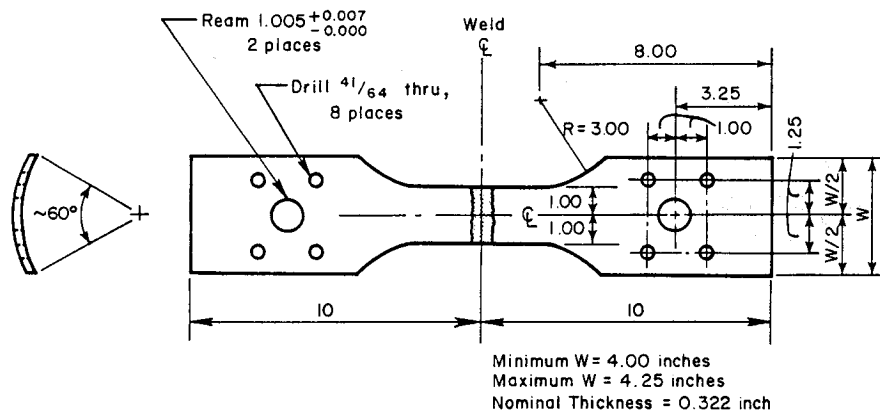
PIPE WALL SEGMENT SPECIMEN DESIGN
